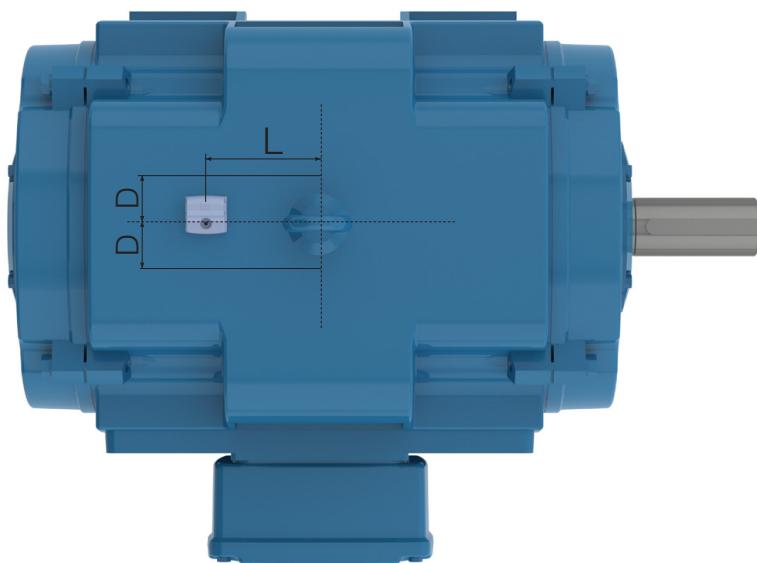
Detail of the drilling for mounting the WEG Motor Scan
